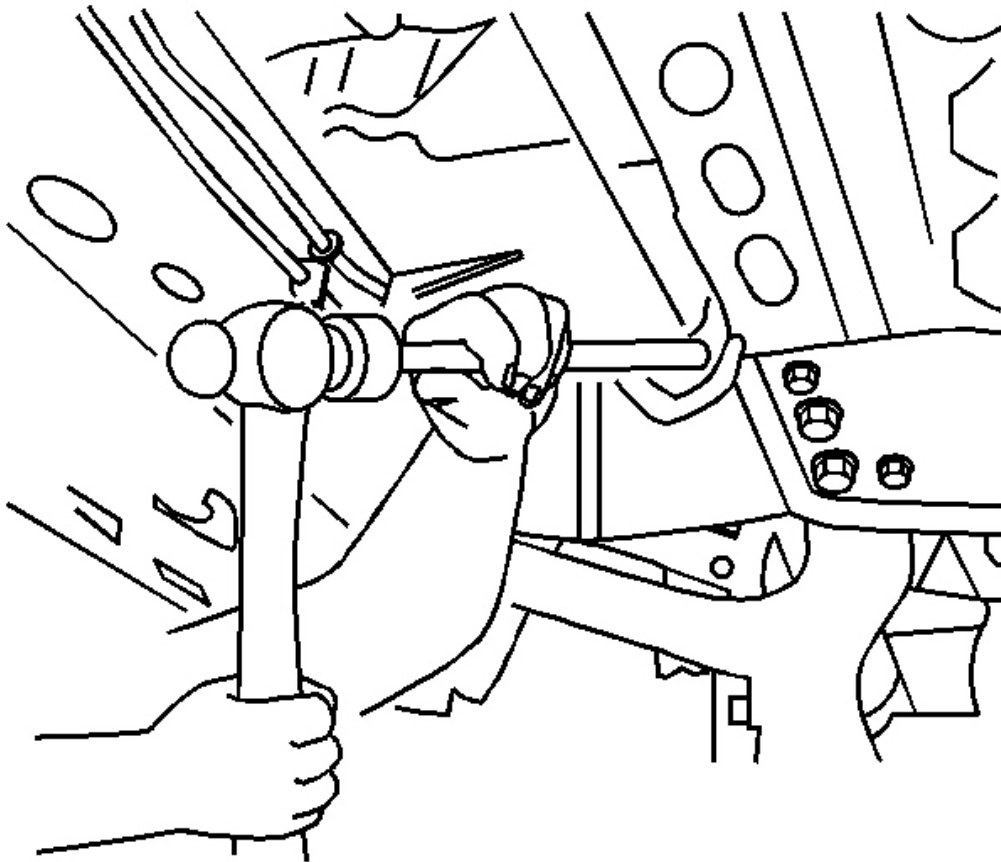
Removing Right Wheel Drive Shaft From Front Differential
